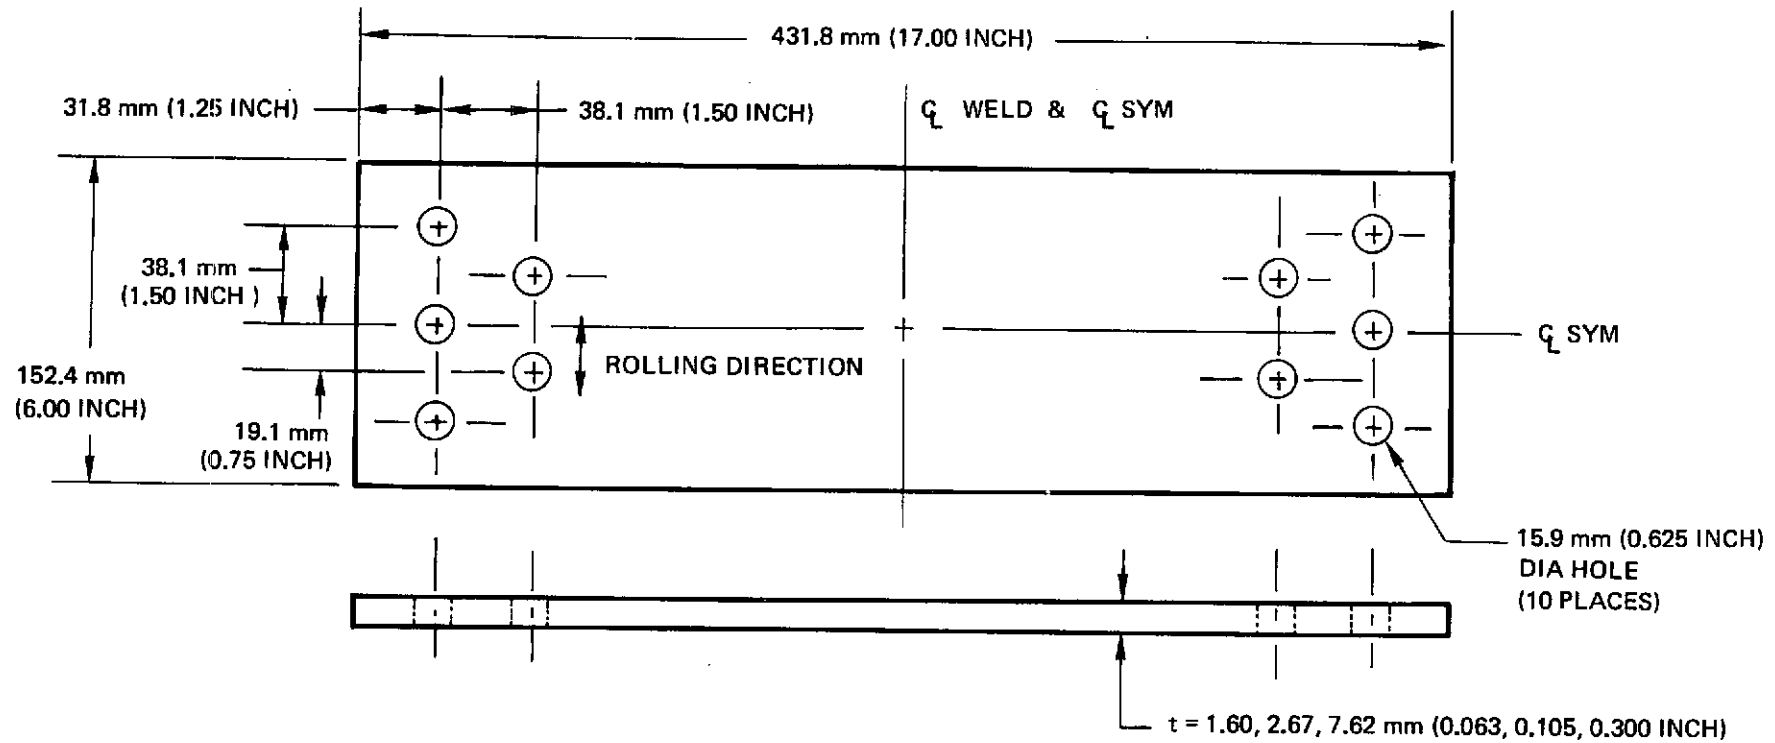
152.4 mm (6.00 INCH) WIDE 2219 – T87 ALUMINUM ALLOY WELDMENT SPECIMEN
